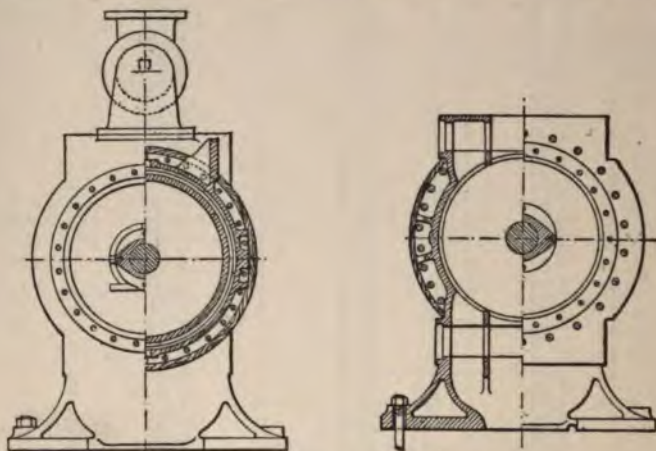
Hick, Hargreaves & Co.: Cylinder, Sectional Elevation and Plan. Scale 1/48th.
